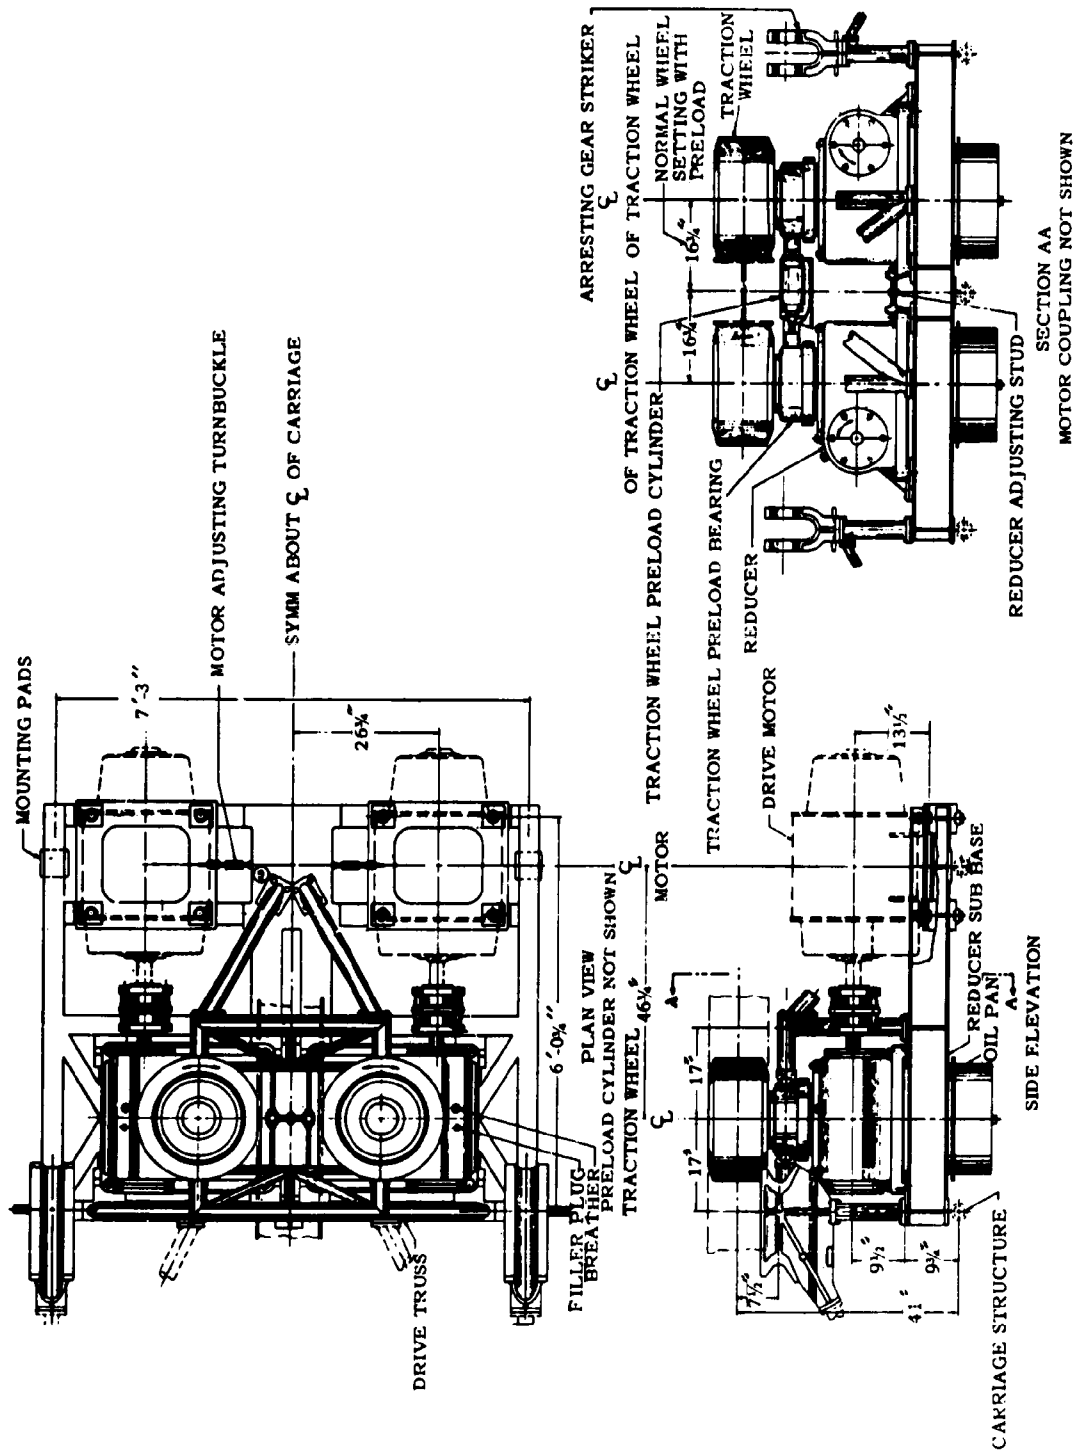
Maneuvering Bridge Towing Carriage Drive Assembly
